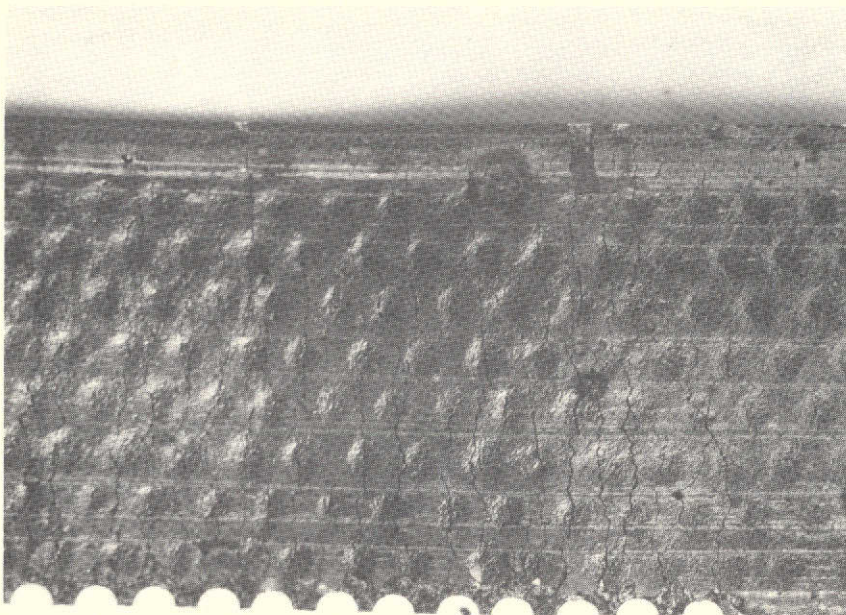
Type F Positive Plate - Bend Test Specimens 3X
